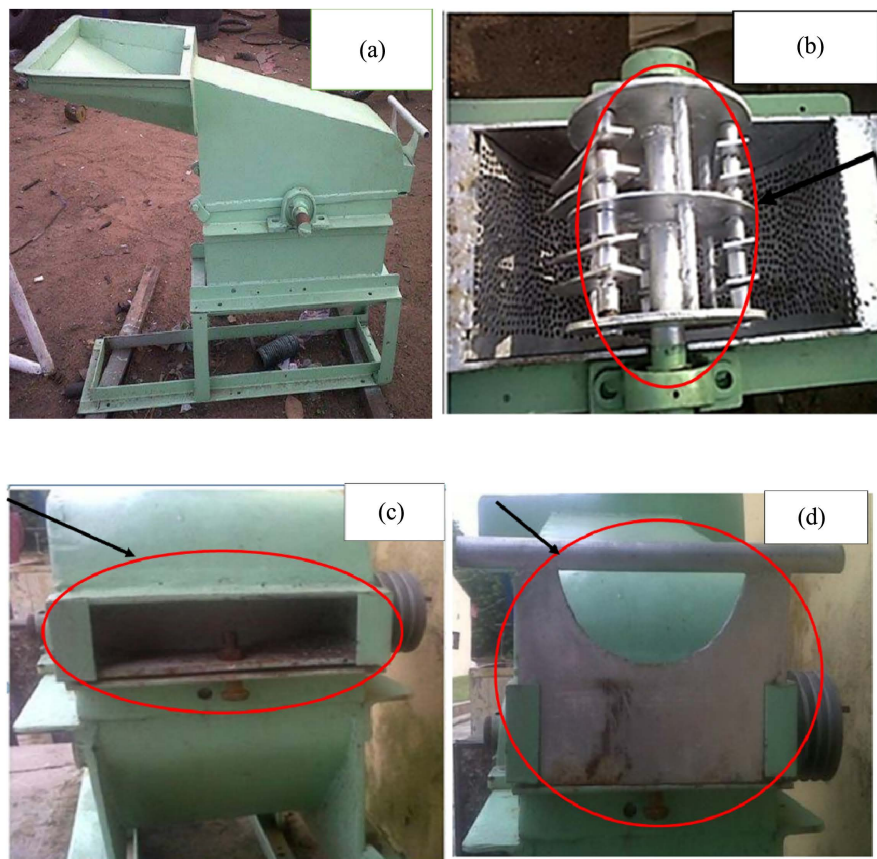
(a) Developed milling machine at the site of fabrication (figure excludes electric motor stand); (b) Complete assembly of hammers and sieve plate; (c) Safety hollow opened after milling operation and (d) Figure of safety hollow closed with mild steel.
